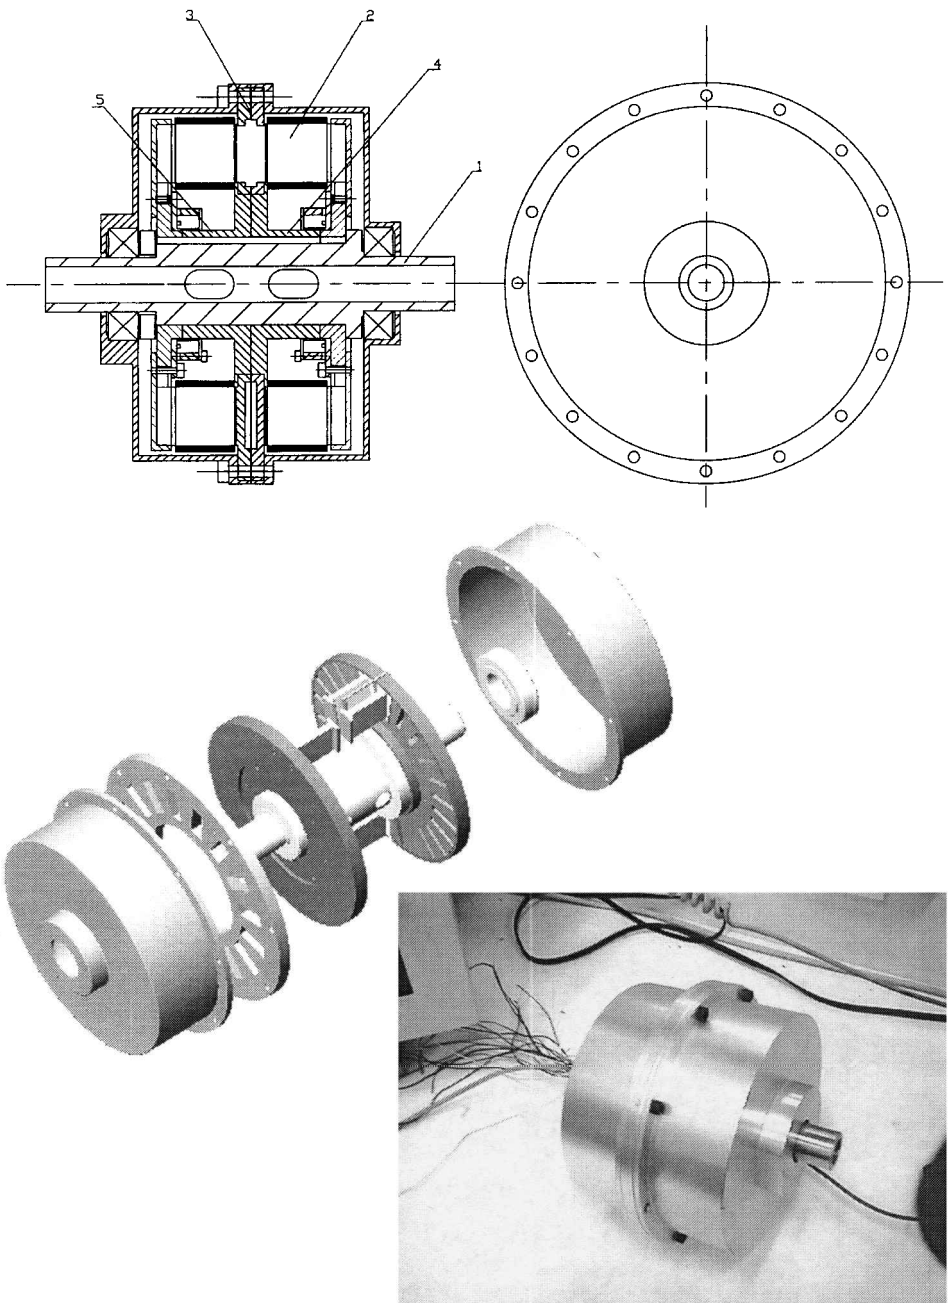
The cross-sectional view, explosive graph, and prototype of axial-flux disc-type wheel motor (1-wheel axle, 2-stator teeth, 3-rotor disk, 4/5-positioning axle sleeve).
